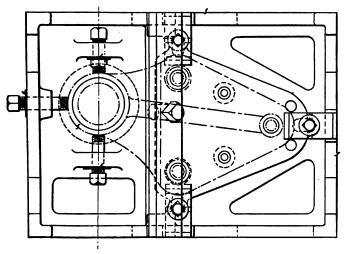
Simple Form of Plate Jig for Drilling Bracket shown in Fig. 97, after Hole E has been bored in the Lathe
